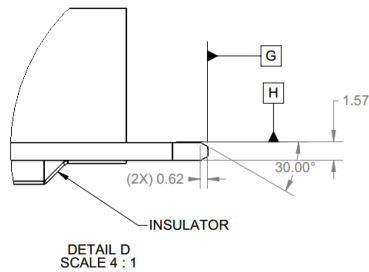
Large Form Factor Keep Out Zone – Side View – Detail D
